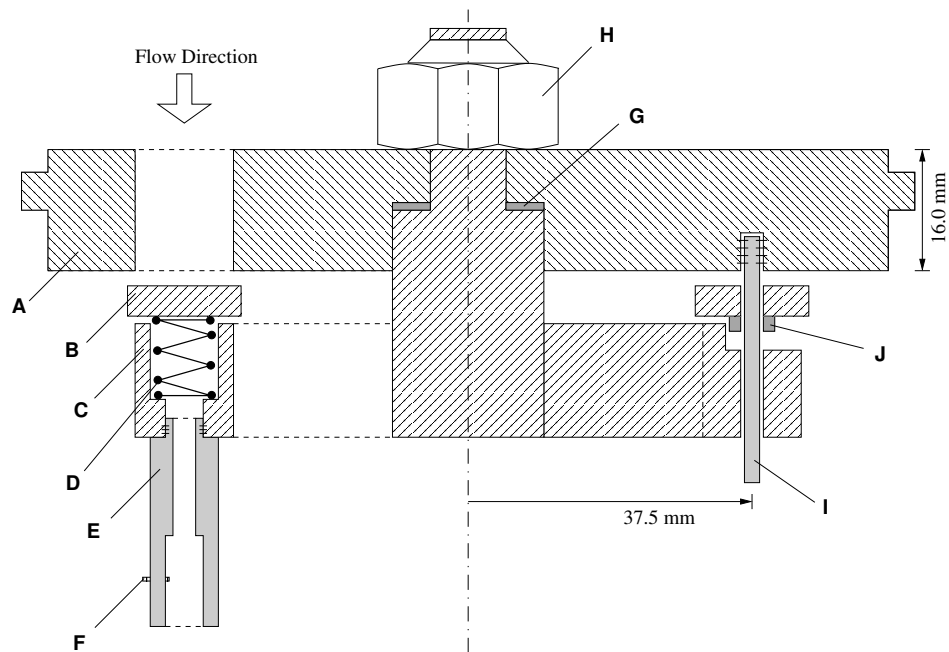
Model valve assembly (A: seat, B: ring plate, C: limiter, D: spring, E: glasfiber connector; F: imbuss screw to adjust the position of the glasfiber; G: high-tolerance ring to adjust the maximum valve opening, H: locking nut, I: guiding rod, J: nylon tube connected to the plate).
